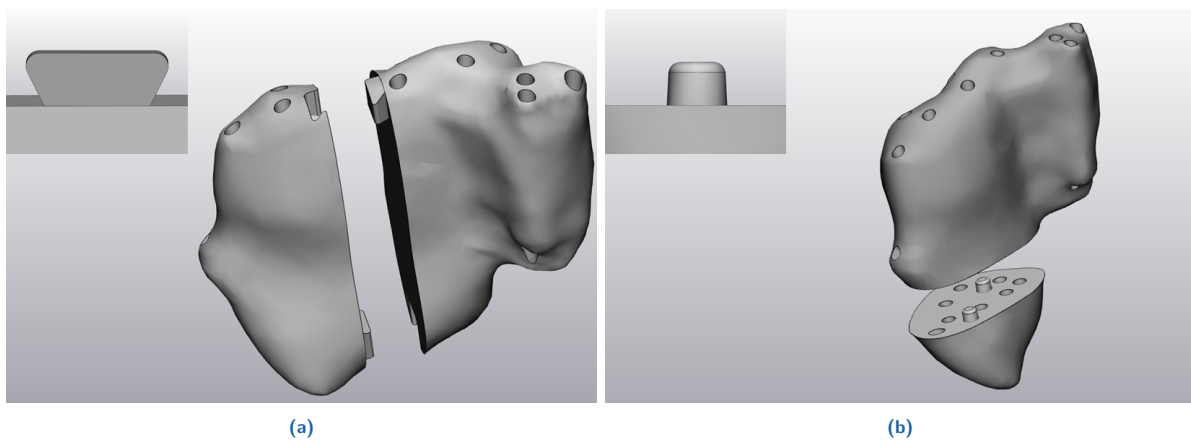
Illustrations of the coupling mechanism. (a) shows the protruding part of the sliding mechanism and (c) shows the tapered pinning mechanism.
